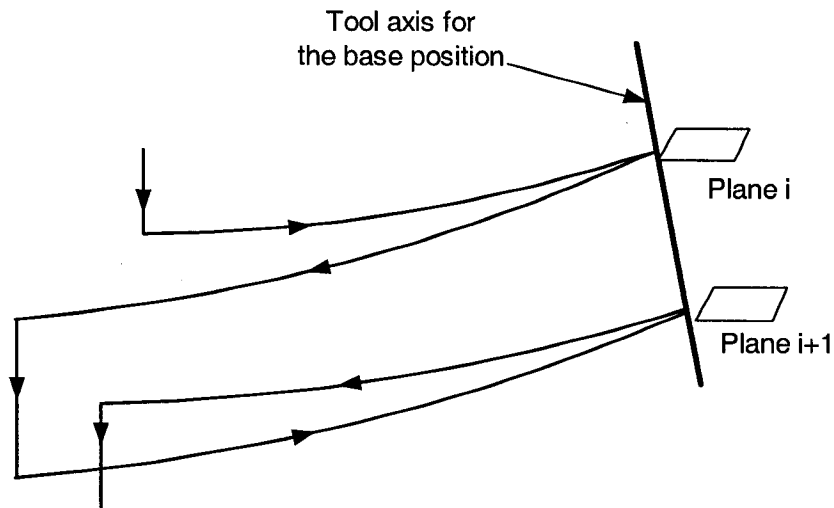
The tool path at and between two consecutive axial levels of machining
